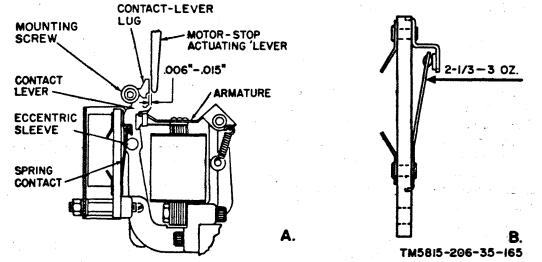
Motor-stop contact-lever lug and relay contacts adjustments (TT-4A/TG).
